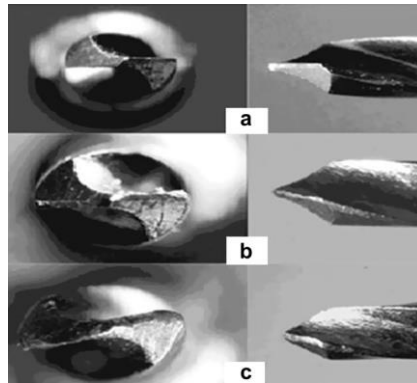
Three drills end and side view. (a) fresh drill. (b) Worn drill, (c) Worn drill (used for several months)
